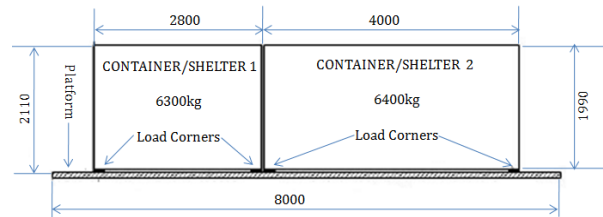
Dimensional details of platform and platform mounted shelters (dimensions in mm)
